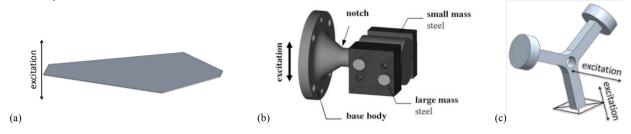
(a) trapezoidal plate specimen; (b) cylindrical specimen with eccentric tip mass; (c) Y-specimen
